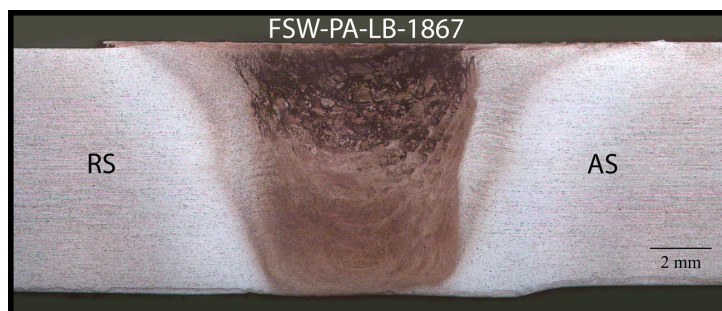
Macrograph of the weld FSW-PA-LB-1867 (8 mm/s; 1000 rpm; 20 kN) revealing the largest defect region.
